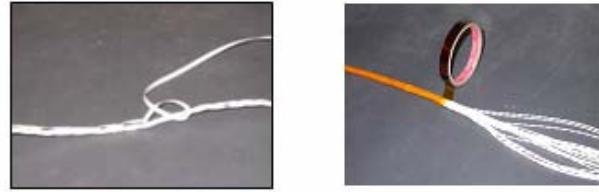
Cable construction: (a) lacing; (b) Kapton wrap
